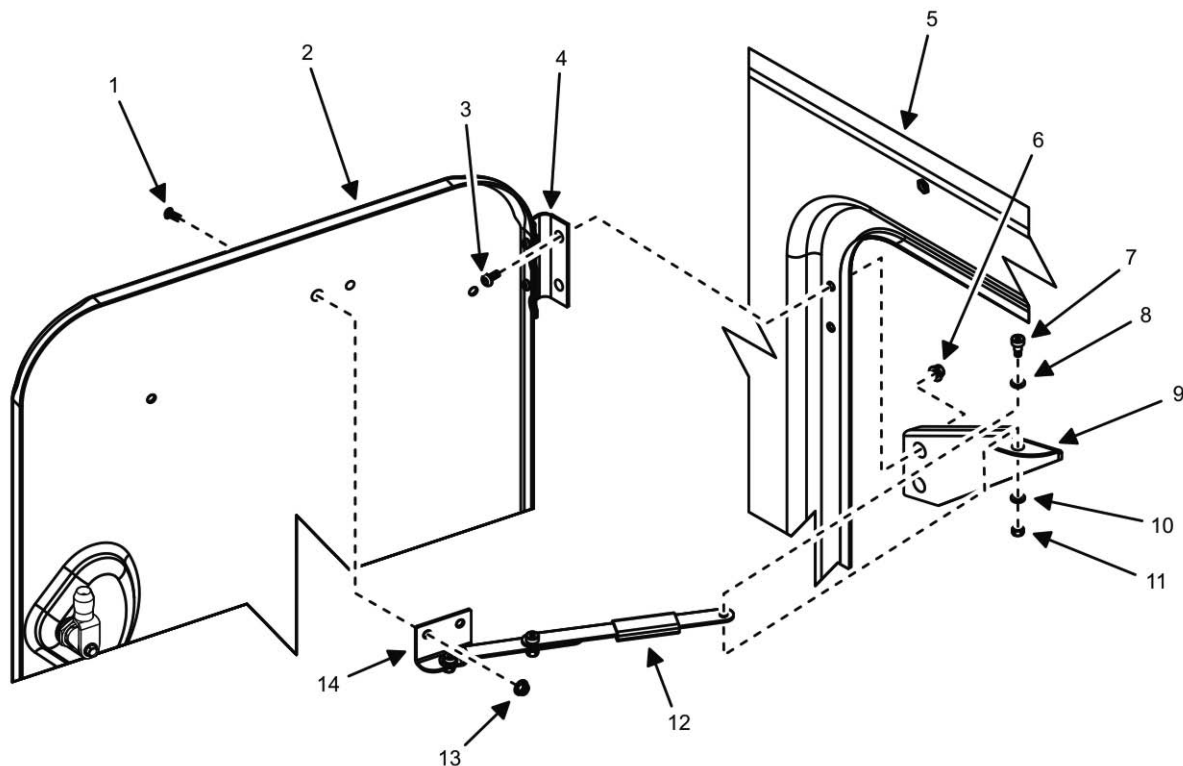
Door Stay, Bracket, and Hinge — Detail.
